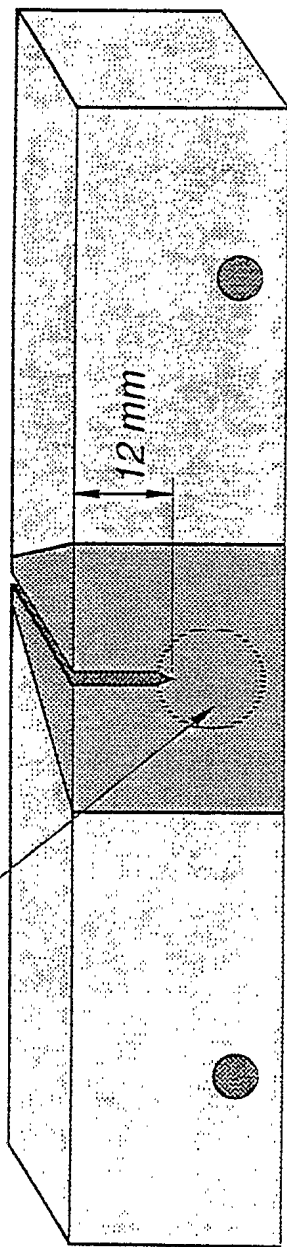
Cutting pattern for SENB specimens from test welds.
